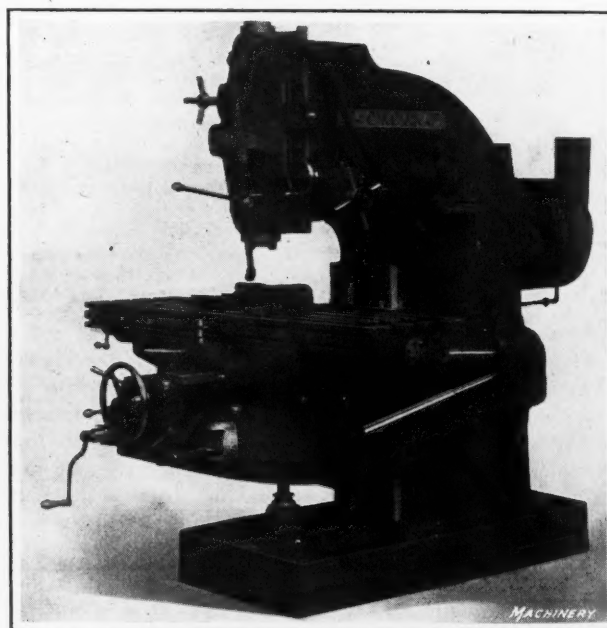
Right-hand View of Same Machine shown in Fig. 1, without Circular Milling Attachment
